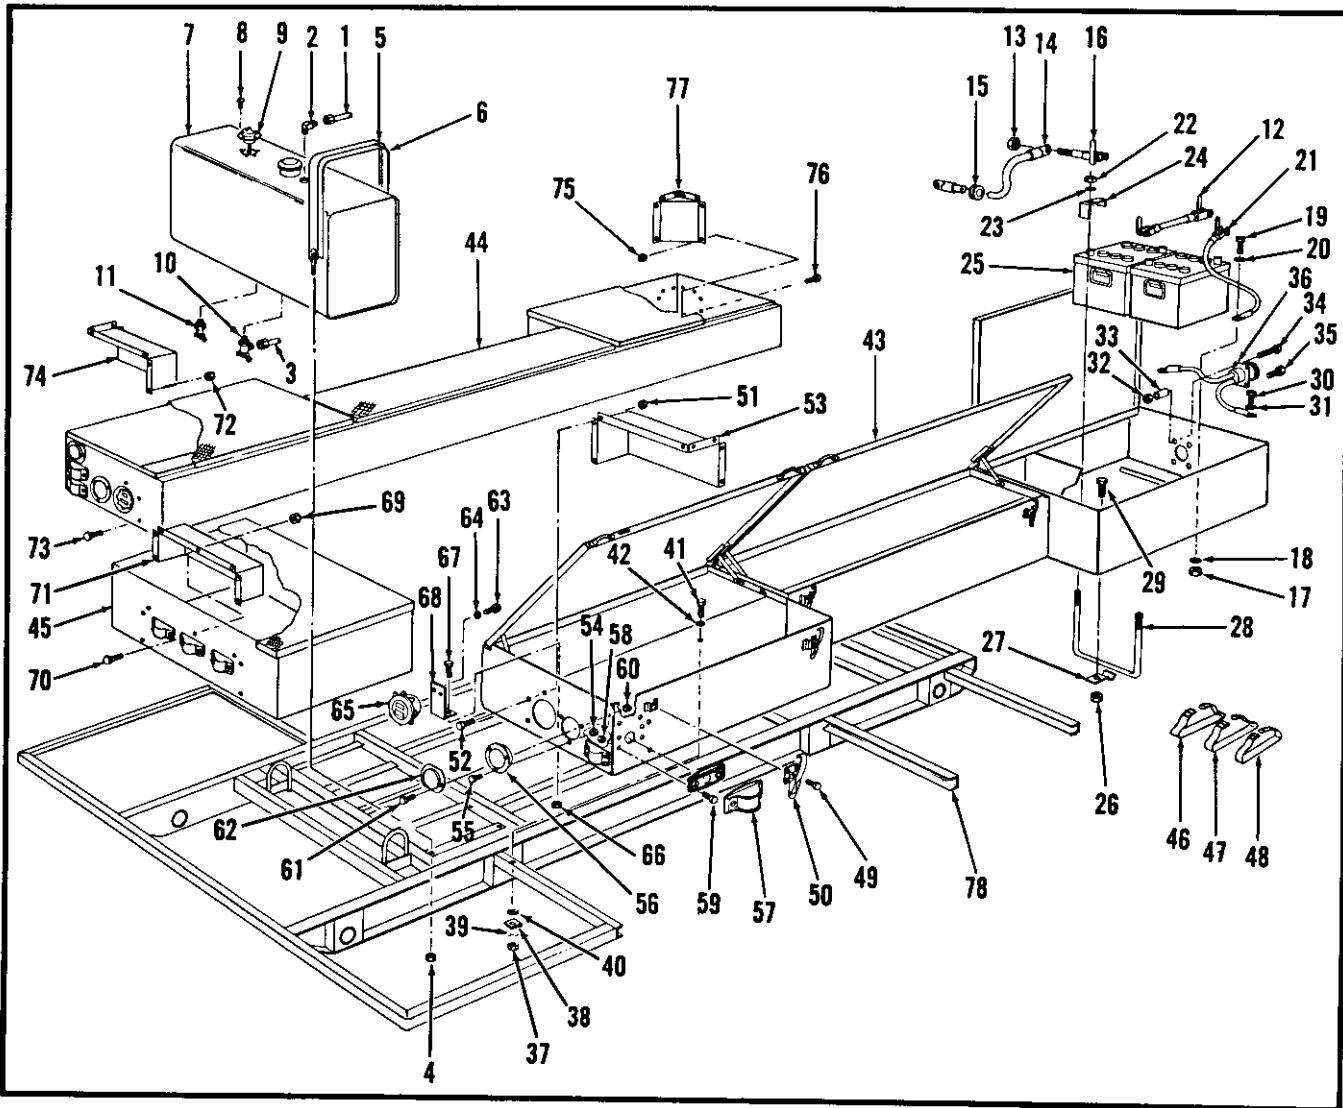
Tool Boxes and Fuel Tank, Removal and Installation
